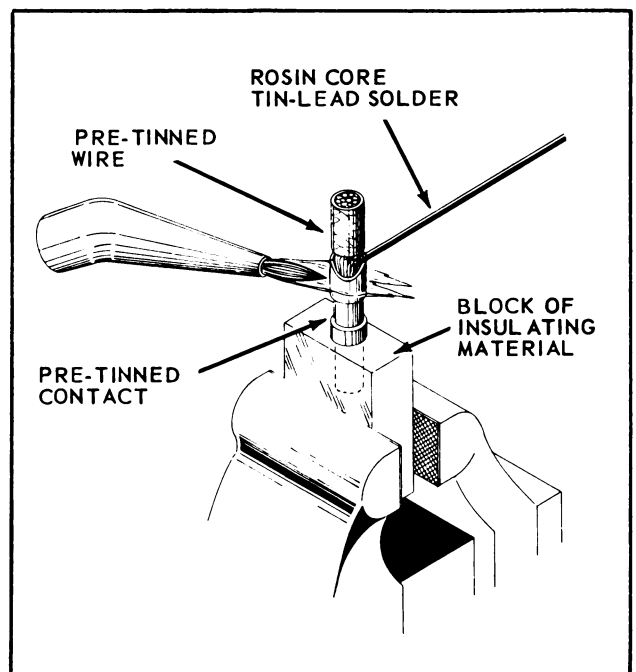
Torch Soldering Thermocouple Wire to "AN" Connector Contact
